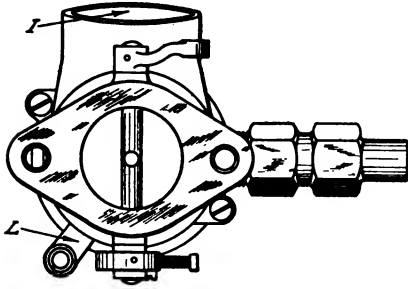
Top View and Section of Johnson Carburetor, Model "D"
